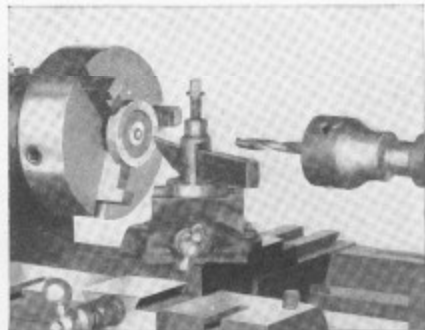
Drilling and Facing a Replacement Part Held in a 3-Jaw Chuck.
